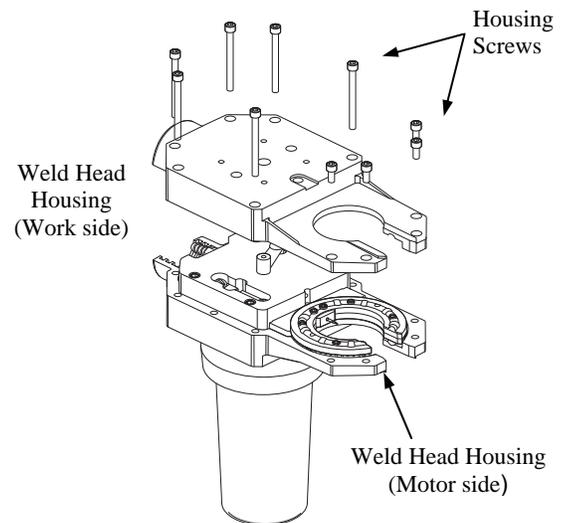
Removing the Locking Ring Half of the Weld Head Housing
